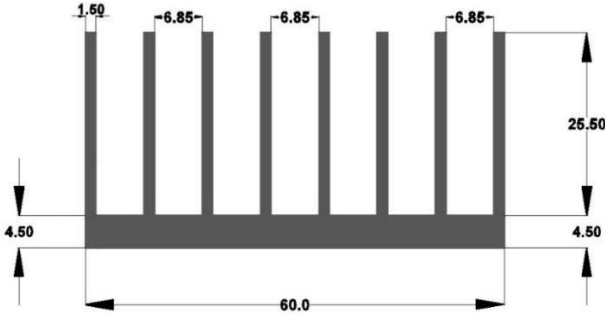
Dimensions of 1.5 mm thick fin heat sink.
